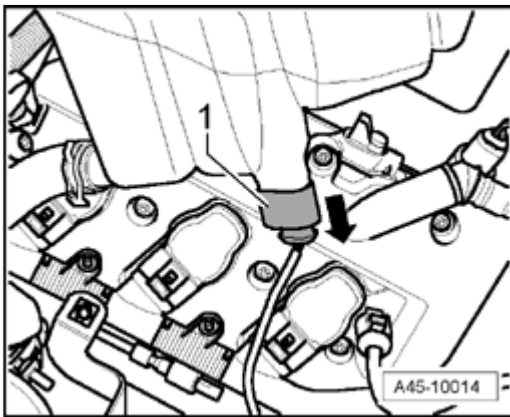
Moving Coolant Expansion Tank Clear To One Side
